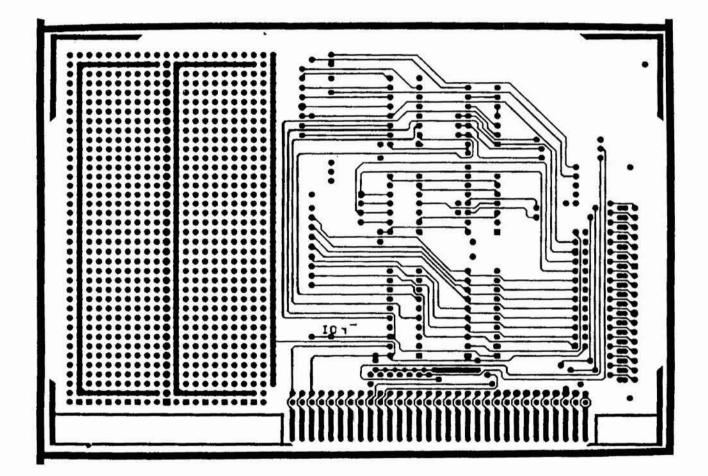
(a) Layout of PCB for PC interface module (Solder side)
